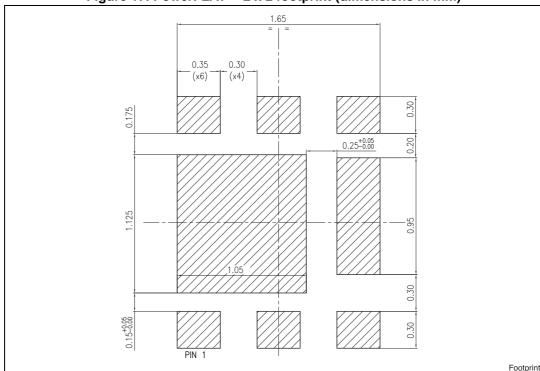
PowerFLAT™ 2 x 2 footprint (dimensions in mm)
